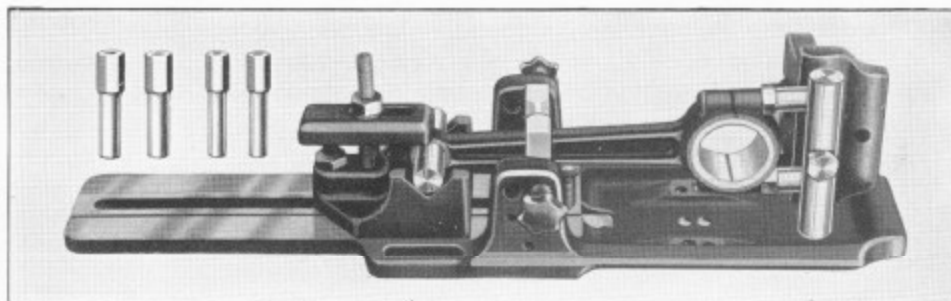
Connecting rod boring attachment for South Bend Lathes.
